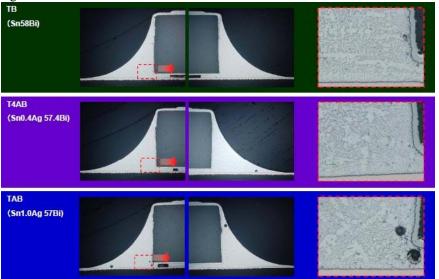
Sn58Bi, Sn57.6Bi0.4Ag and Sn57Bi1Ag soldered 3216 [1206] chip component cross-sections.
